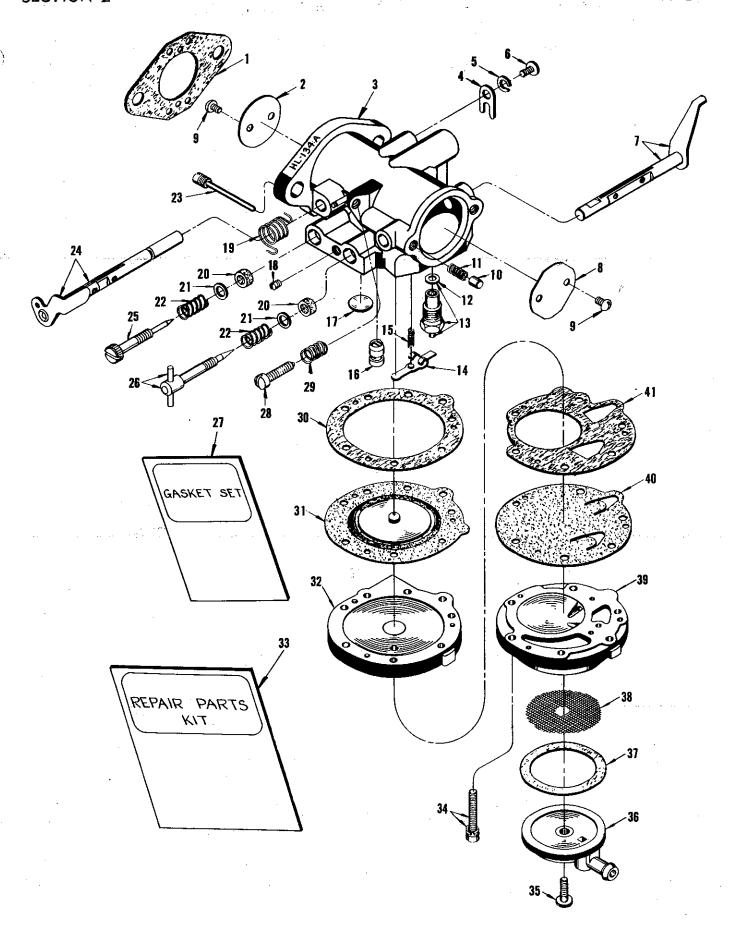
EXPLODED VIEW OF HL CARBURETOR
